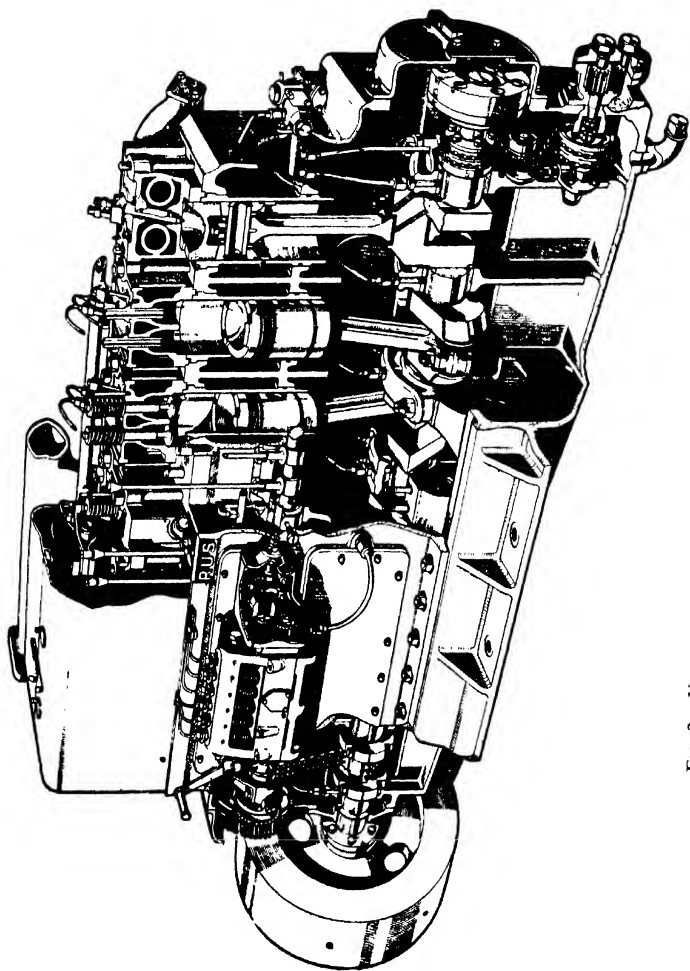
VERTICAL-TYPE SIX-CYLINDER, FOUR-CYCLE DIESEL ENGINE
